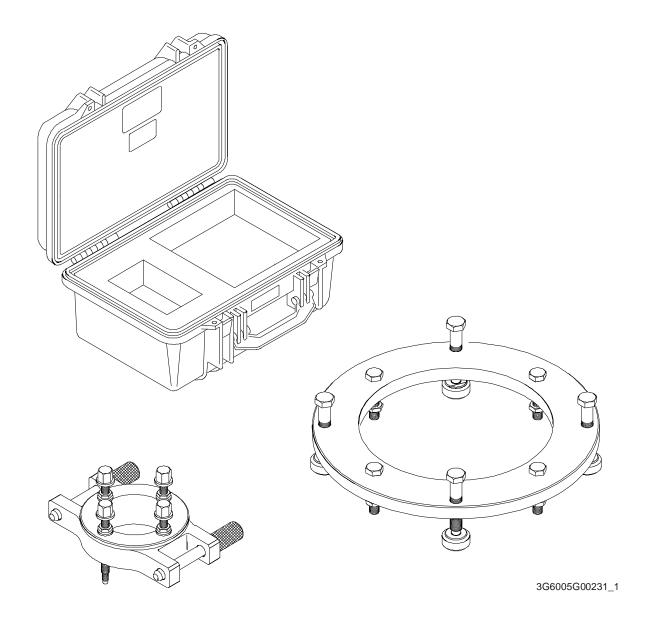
Puller kit, M/R and T/R upper ring rem.
